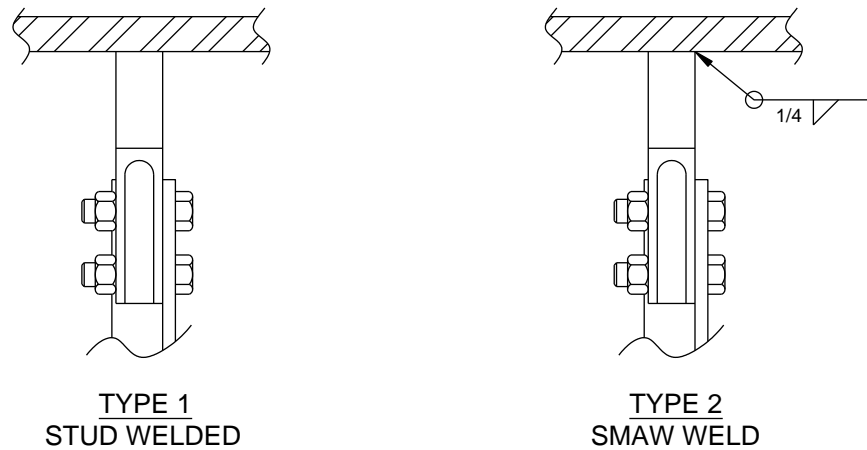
Rounded Corner Welded Stud Attachment
